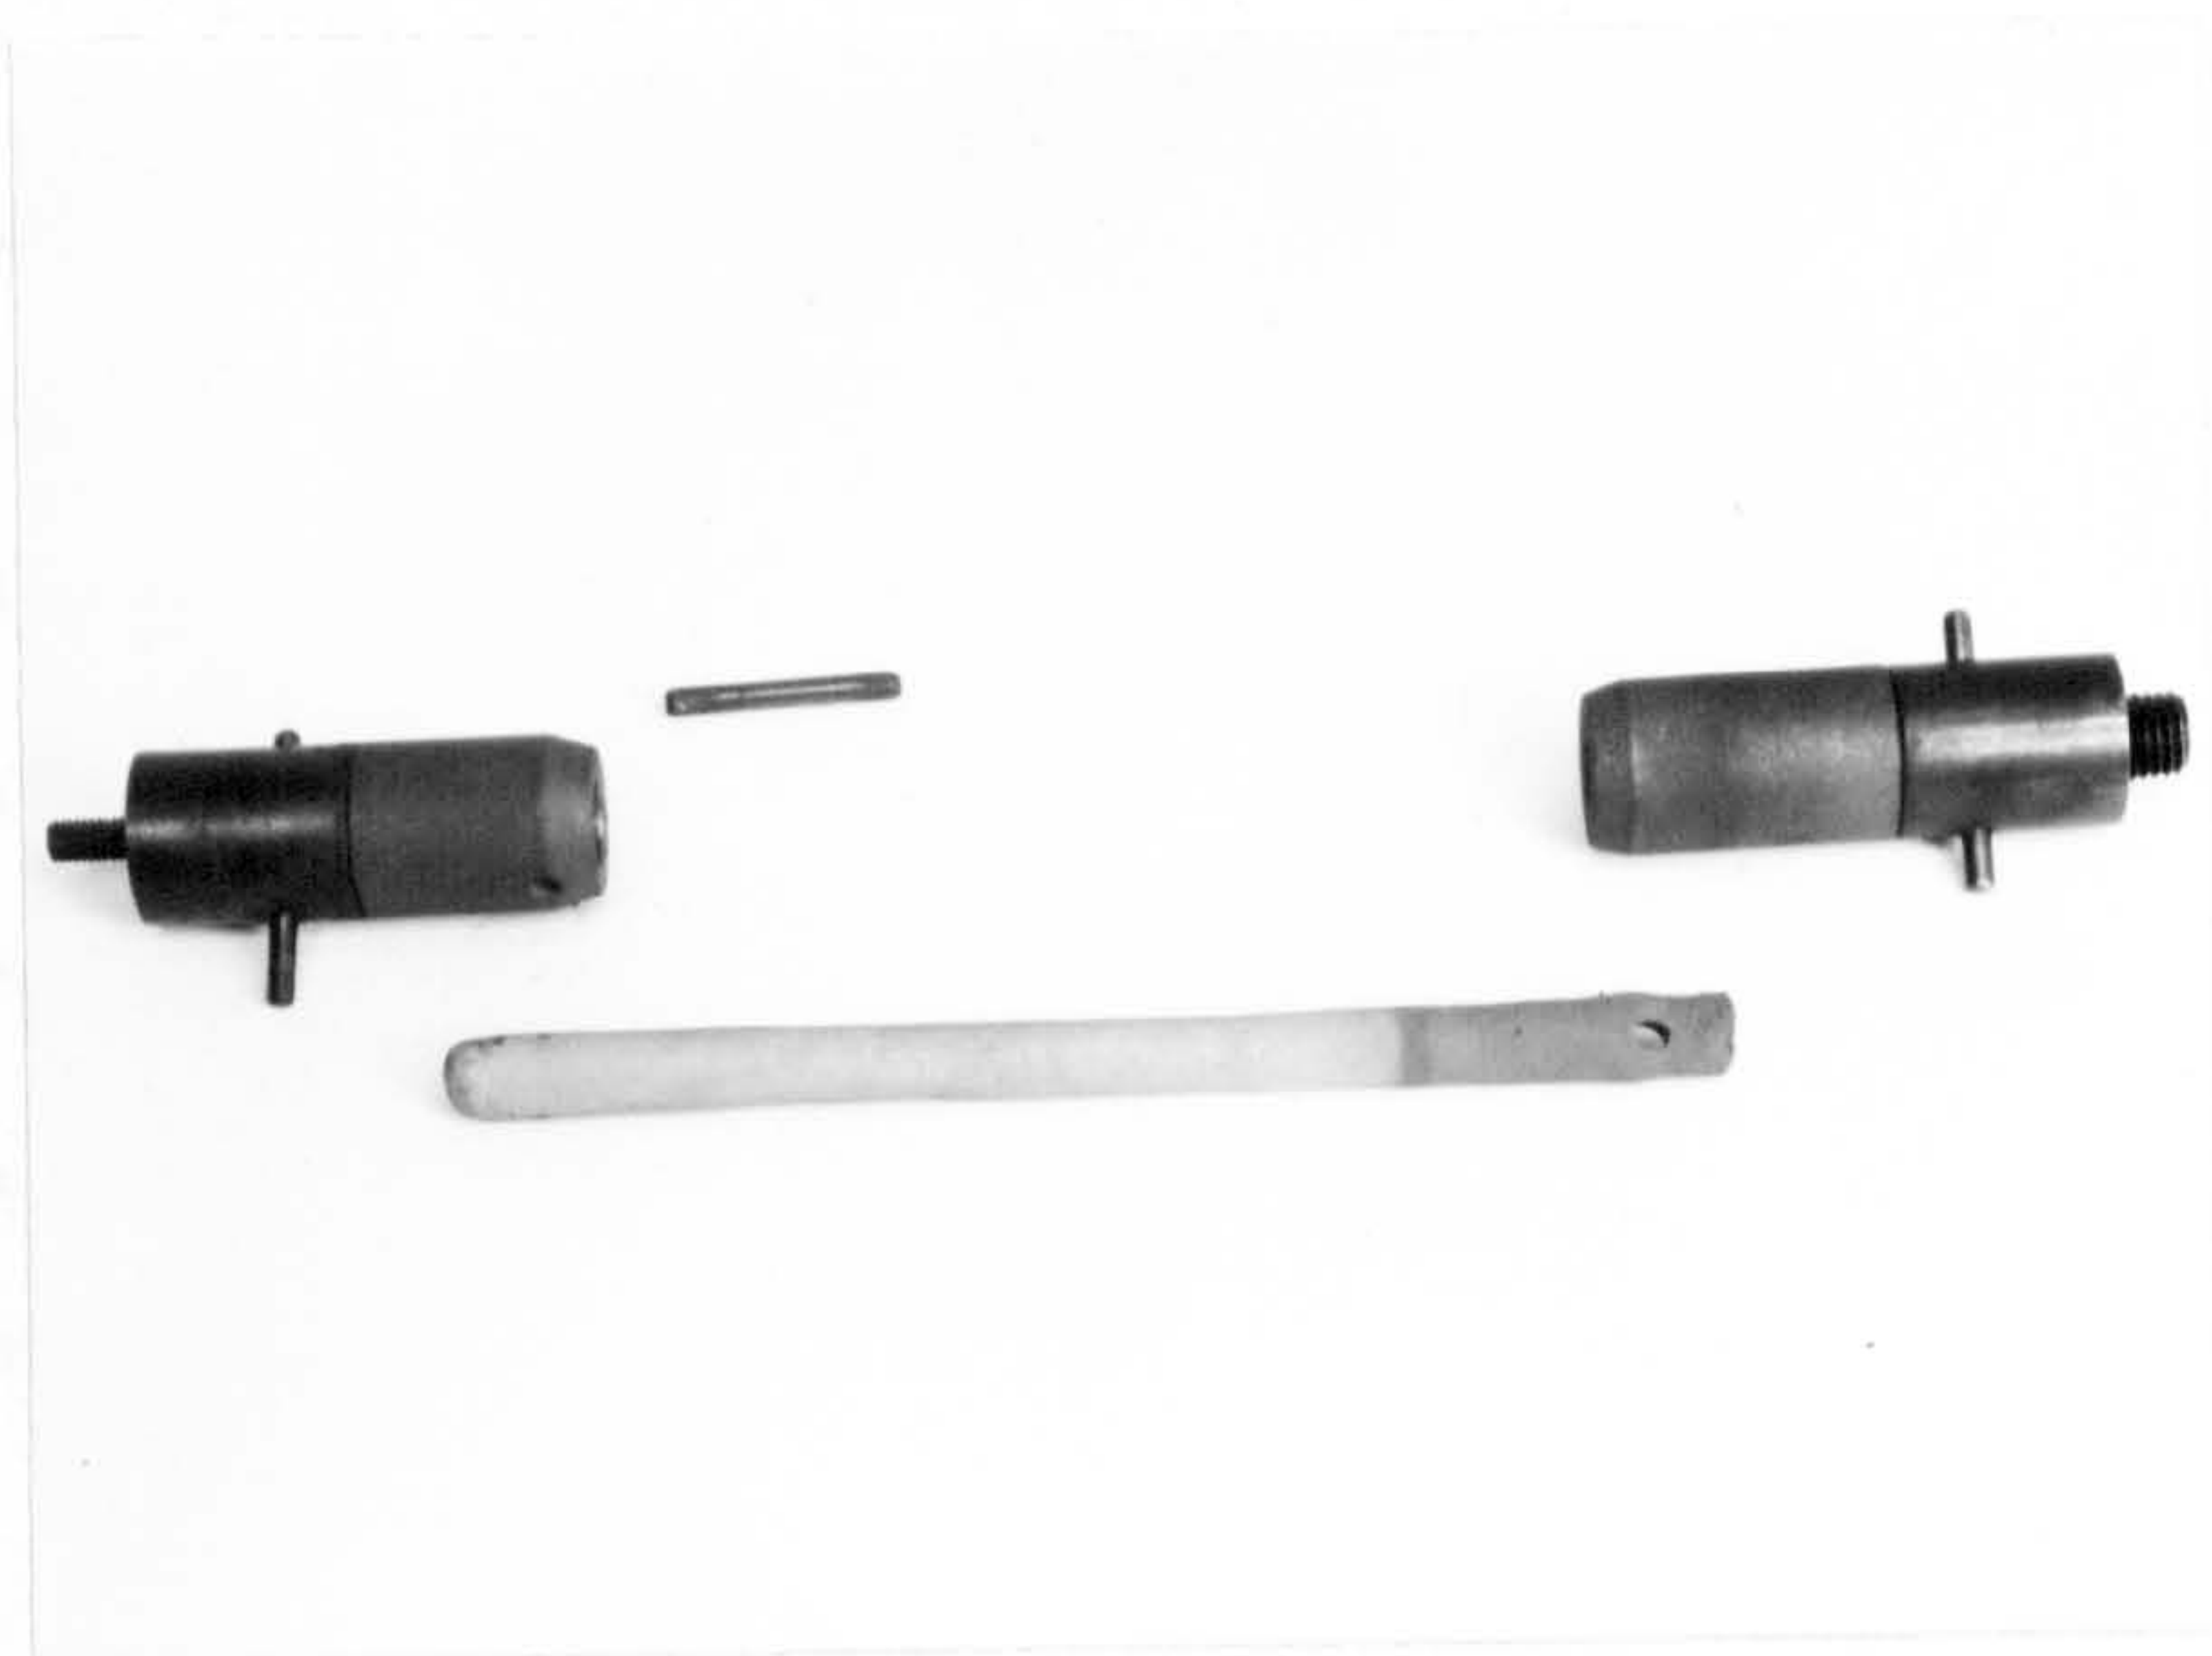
Means of attaching sintered carbide rod to apparatus pull rods via. graphite holders.
